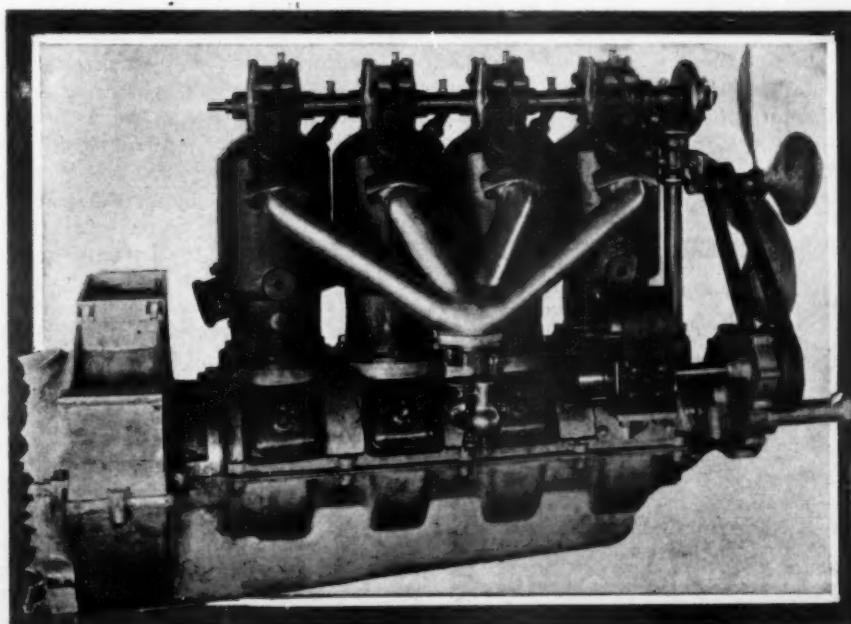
Intake side of Model 50 motor, showing carburetor, magneto and crankcase broken off back of flywheel
